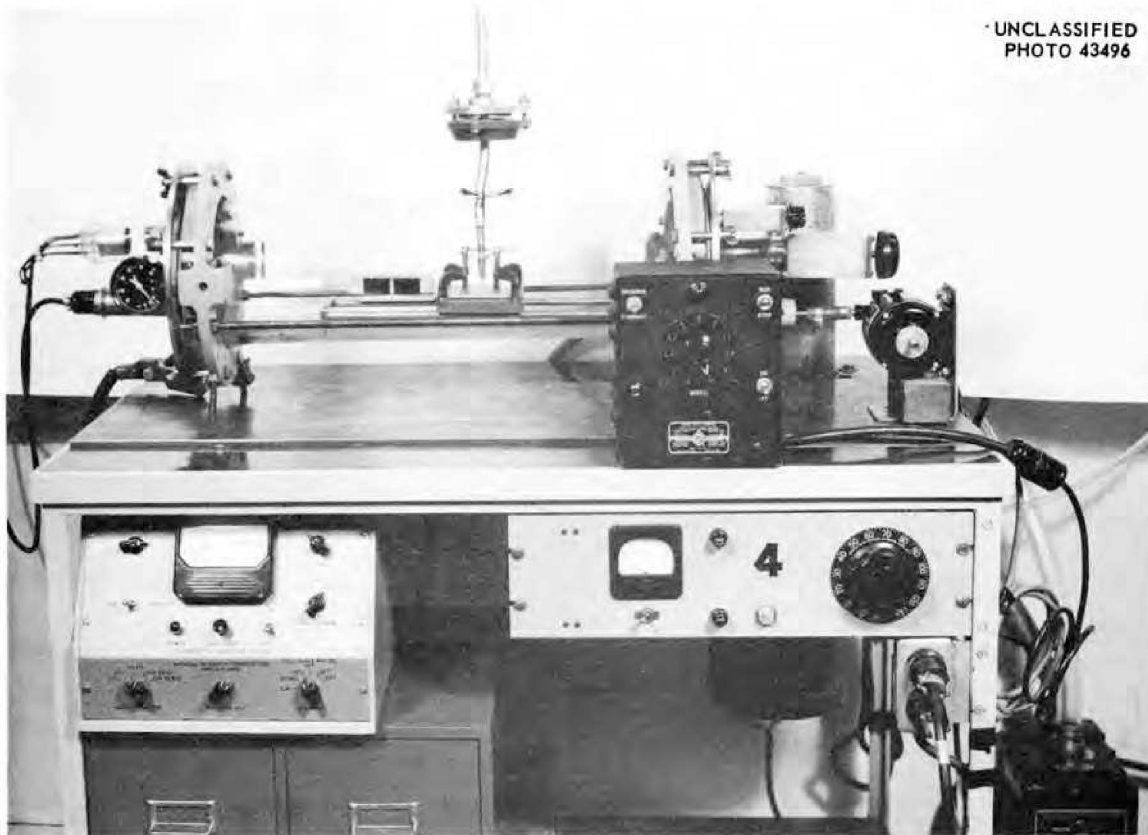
Inert-Atmosphere Chamber for Columbium-Alloy Welding Studies.
